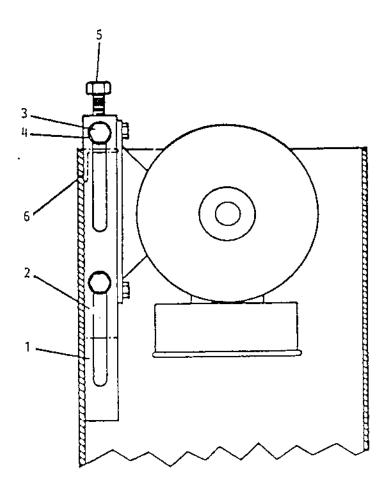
MOTOR MOUNTING BRACKET ASSEMBLY
